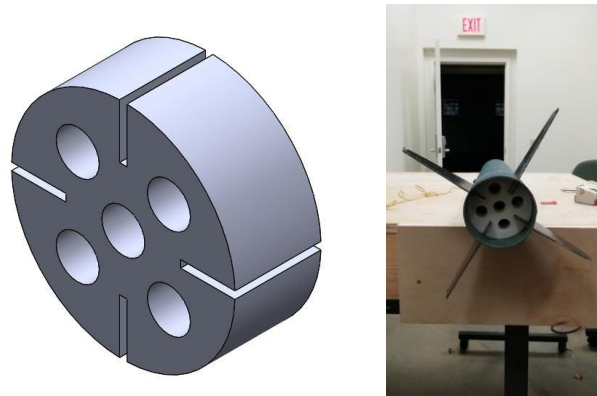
On left, fin mounting tool; on right, fins dry-fit into fin mounting tool and aft body tube.
